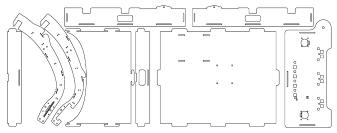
CAD designs for the MOD: all components are lasercut from low-cost 1/8" sheet material; minimal hardware is required for assembly
